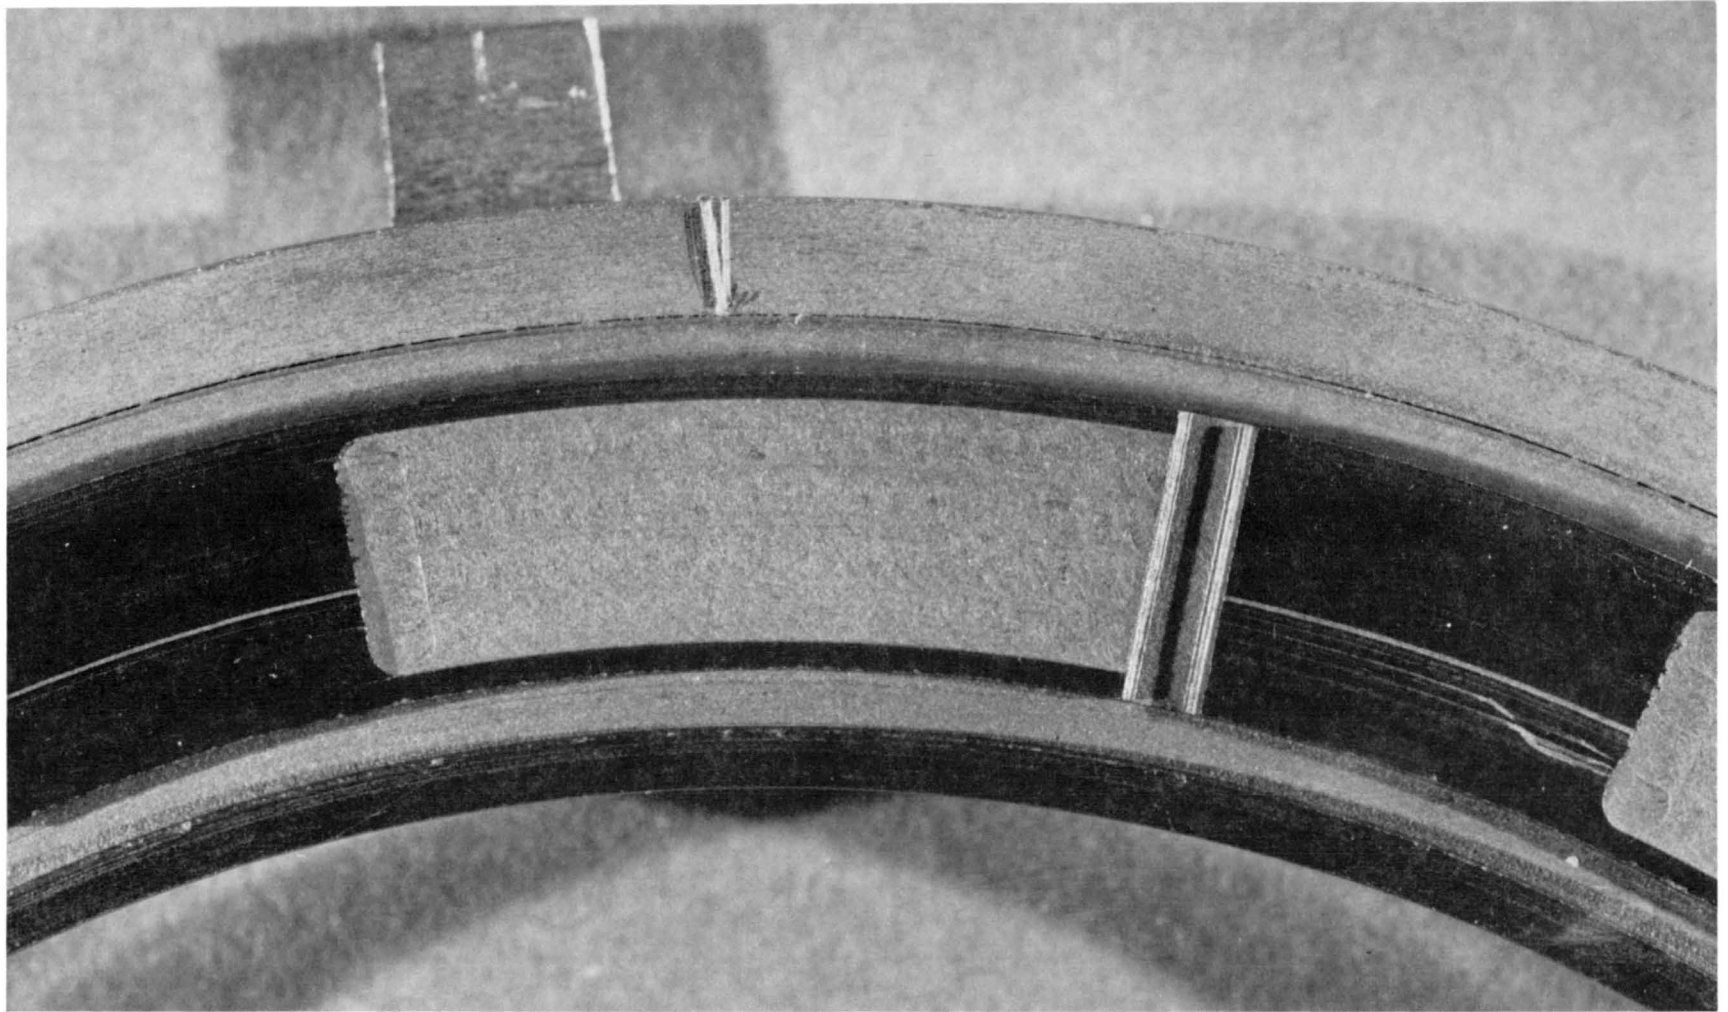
Typical LOX Seal Carbon Recess Pad CF851218, Position 1,
